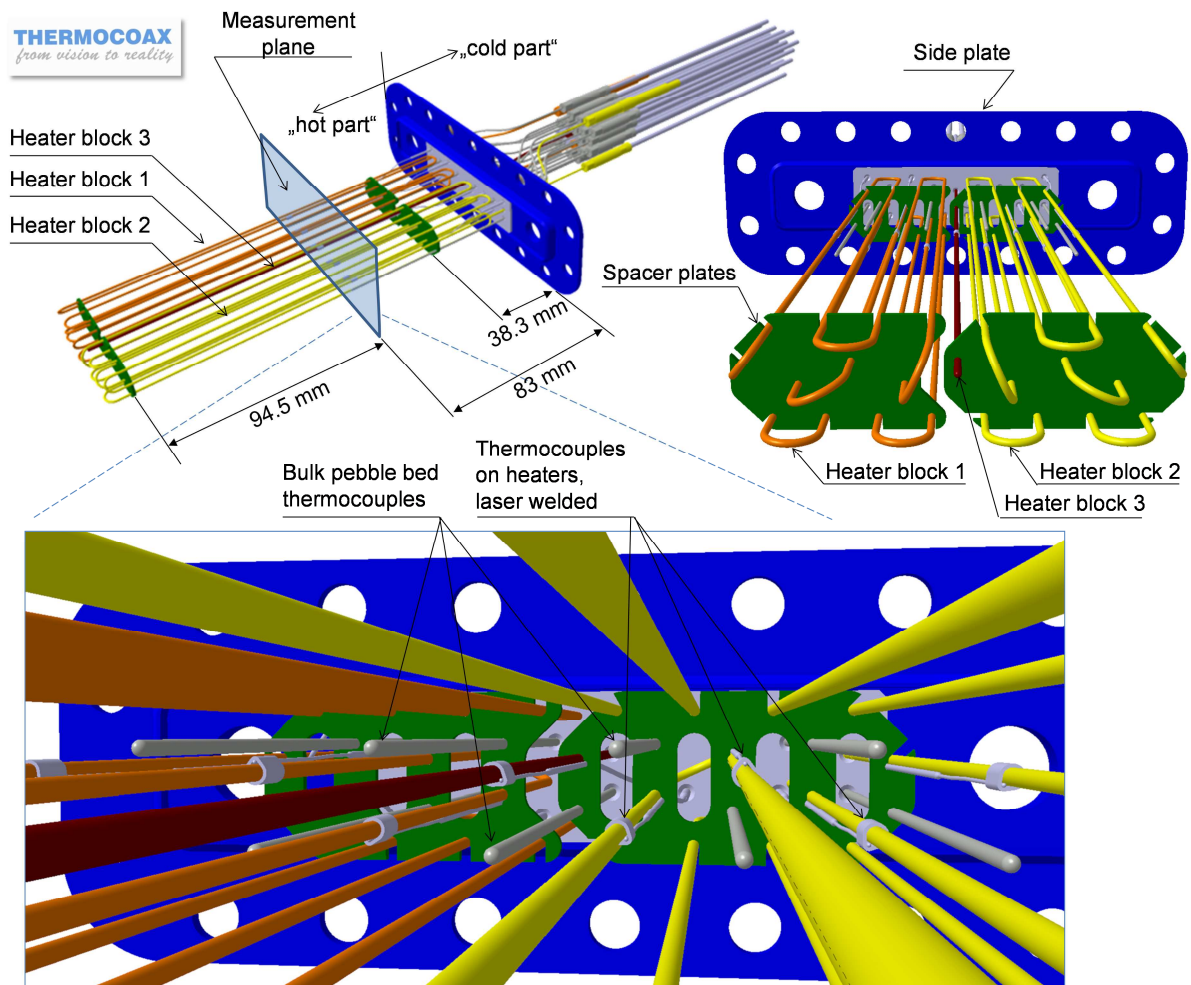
3D CAD model of the PREMUX heater system developed by KIT and THERMOCOAX®. Top: isometric views with identification of the components. Bottom: close view to the system at the measurement plane. In this view, the pebble bed bulk thermocouples and the thermocouples on the heating elements can be observed.
